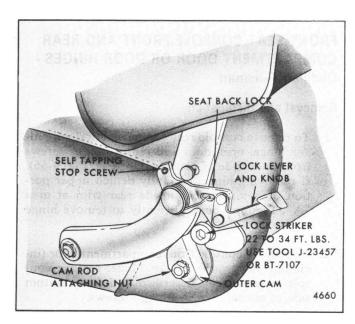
Adjustable Driver's Seat Back - Driver's Side Only - Chevrolet "F and H" Styles
